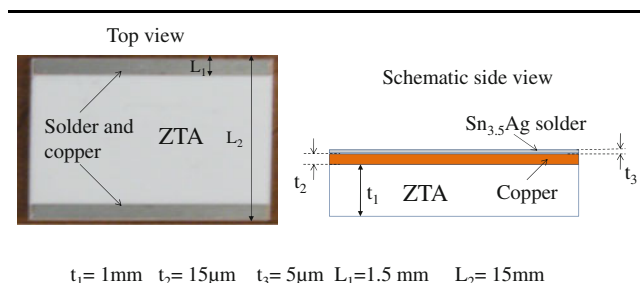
Top view and schematic side view of prebond specimens for DCB and shear tests.
